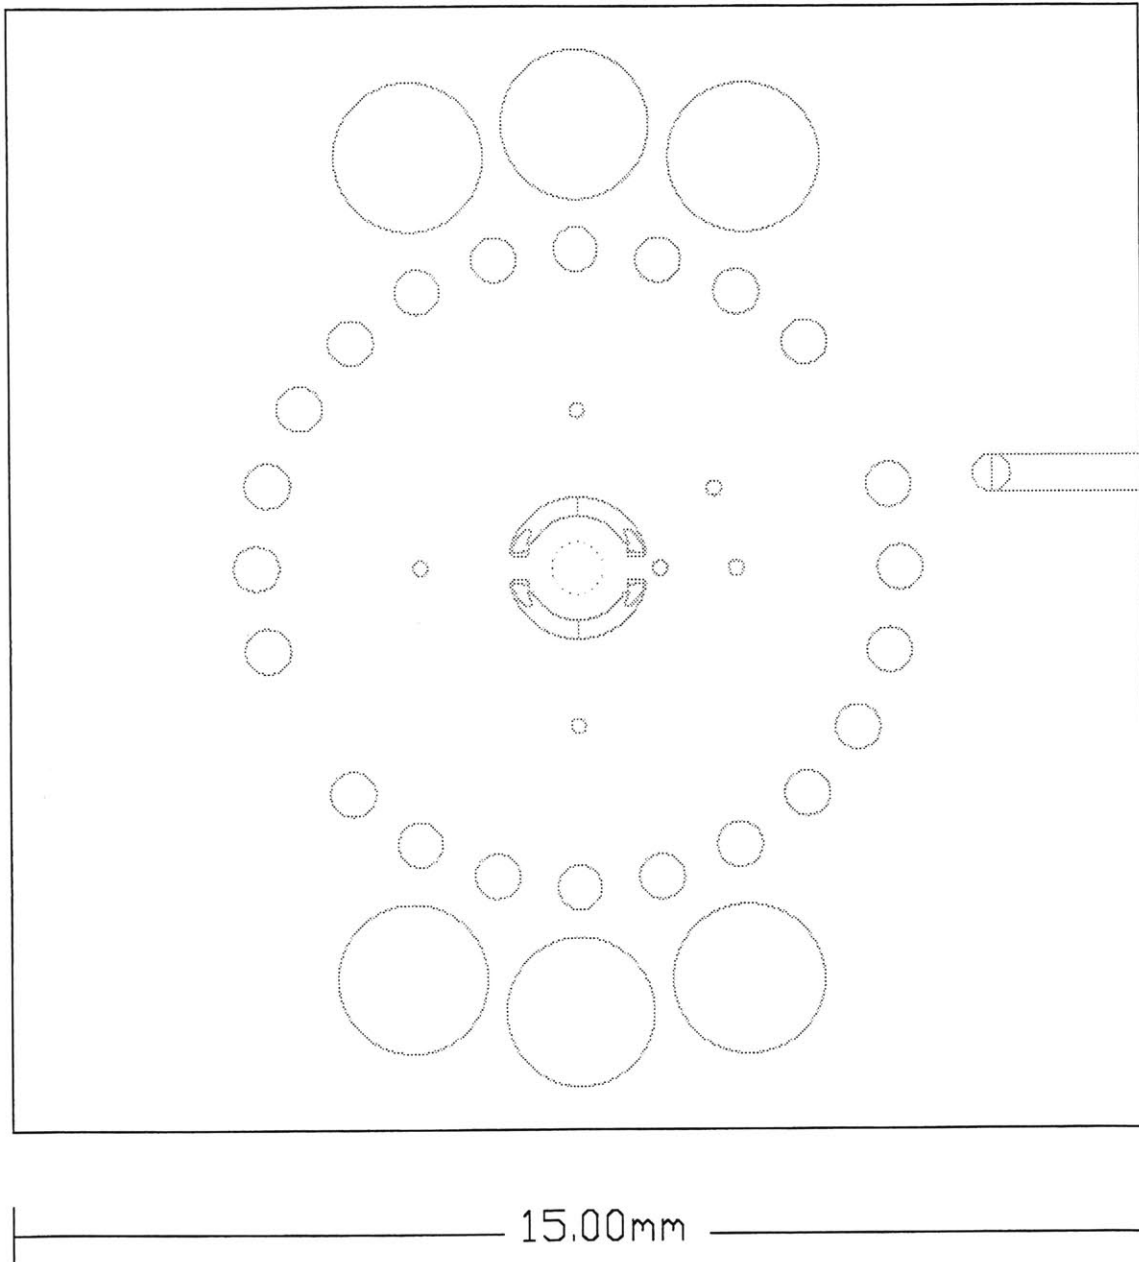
Sample mask drawing: B4b-hd-orifices-3-df—Backside FEP with nozzles shifted (Adapted from Fréchette).
